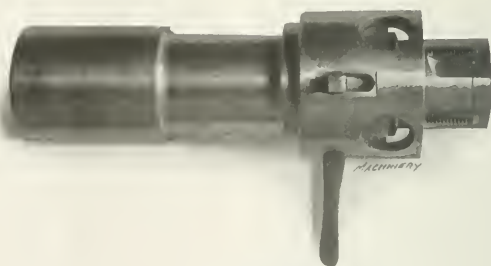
Victor Collapsible Tap used in machining Shrapnel Shells
